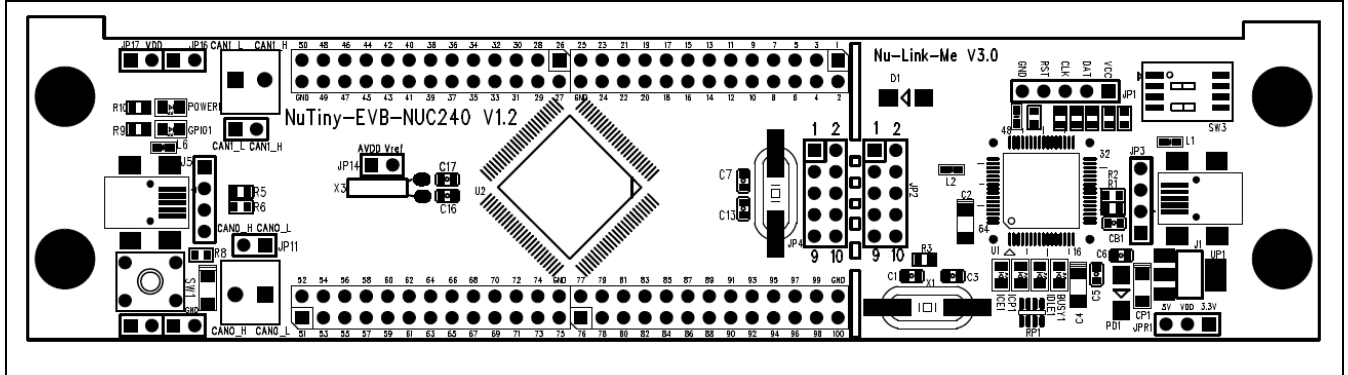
NuTiny-SDK-NUC240 PCB Placement
